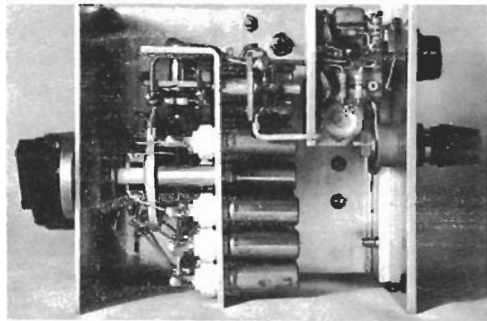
Left side view of the converter, bottom up. The L-shaped aluminum bracket fastened to the bandswitch holds the 11 crystal sockets. The oscillator sub-assembly is above the bandswitch (inside the L bracket), while the mixer sub-assembly is to the right of the bracket, above the crystals. The buffer stage is at top right, feeding the RCA jack at its right.
